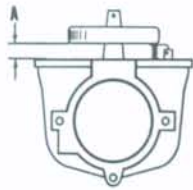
Float setting (A) should be adjusted to 11/64-inch.
